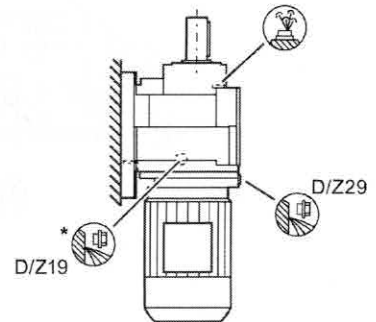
Mounting positions for helical gearbox EF/EZ, flange-mounted design, sizes 39 - 149
